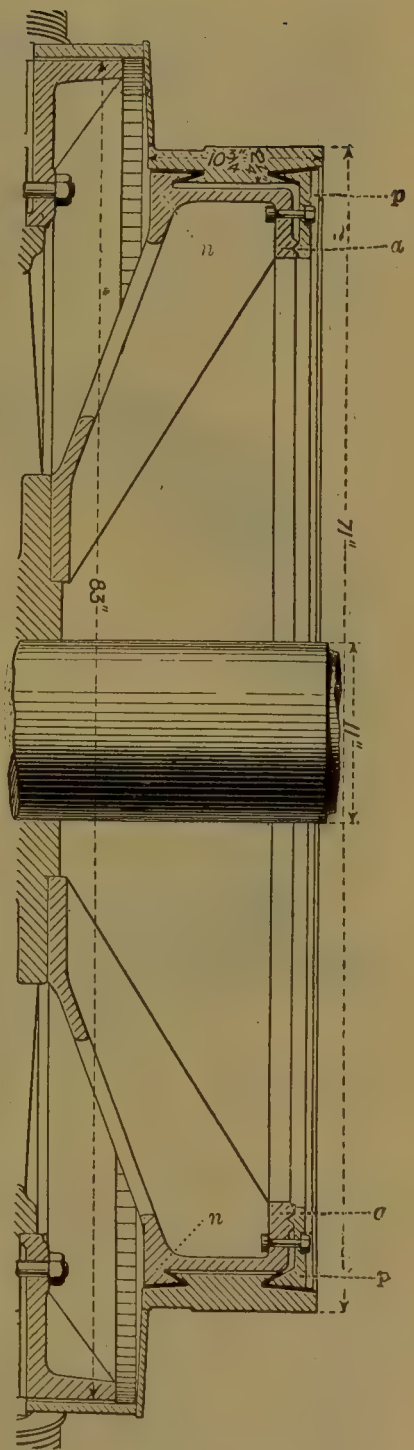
Commutator Details of 600-Kilowatt Machine.
